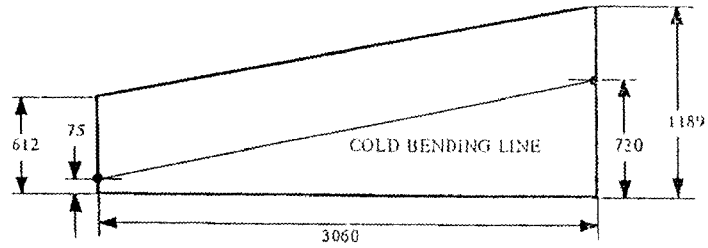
Overall dimension of plate and cold bending scheme (unit : mm)
